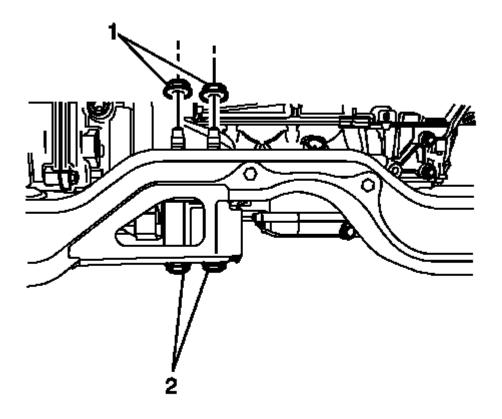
Rear Transmission Mount Through Bolt Courtesy of GENERAL MOTORS COMPANY
